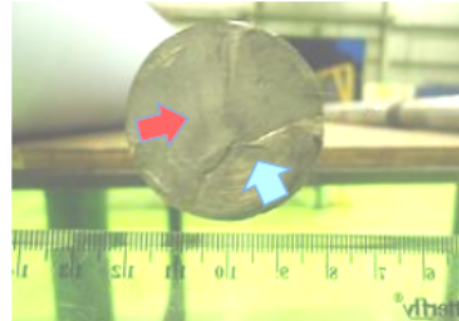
Modes of failure: a. initial crack portion (lower arrow), and b. failure portion (upper arrow)
